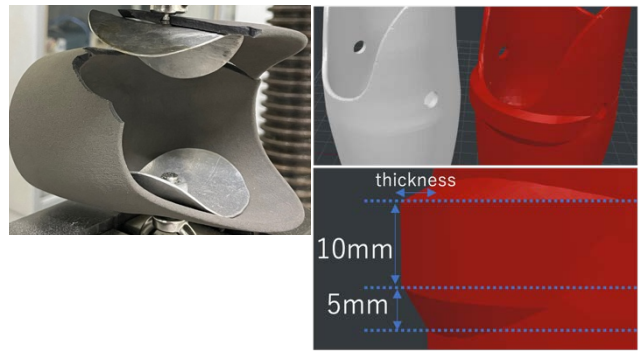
Left: Values recorded during a large crack in the socket. Right: Detail of increasing the thickness of the socket edge.
